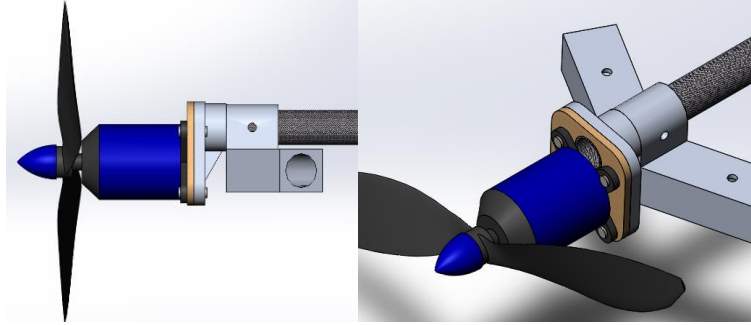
Initial Motor Mount for Production Aircraft
